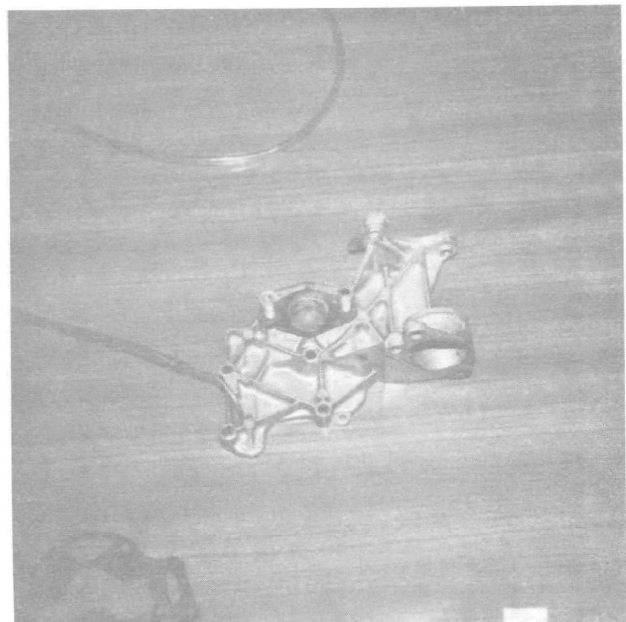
Modified inlet manifold used for tests on engine 26, outside view
